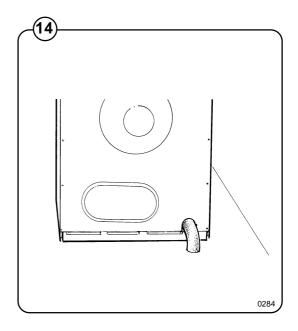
" (75 mm) flexible hose to the drain outlet of the machine and clamp it securely.
